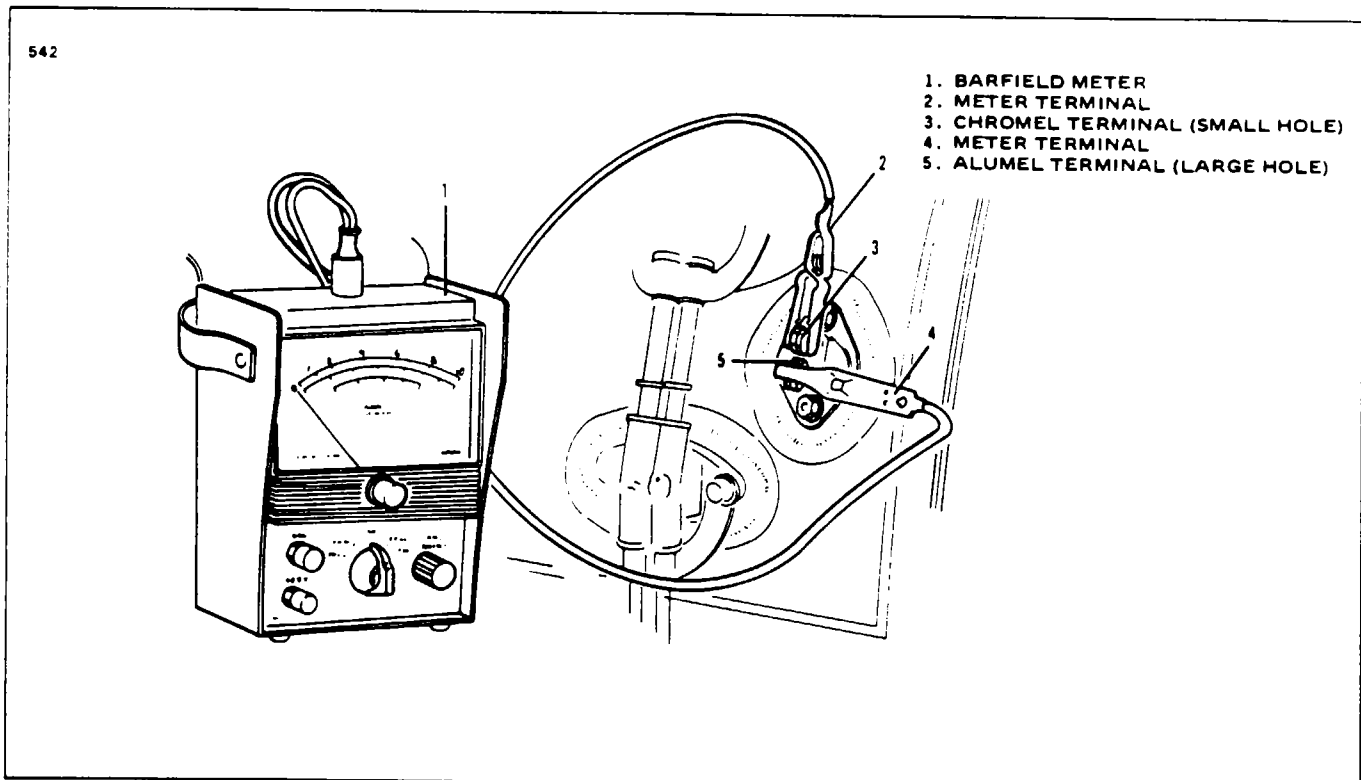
T5 Thermocouple Harness Loop Resistance Check
